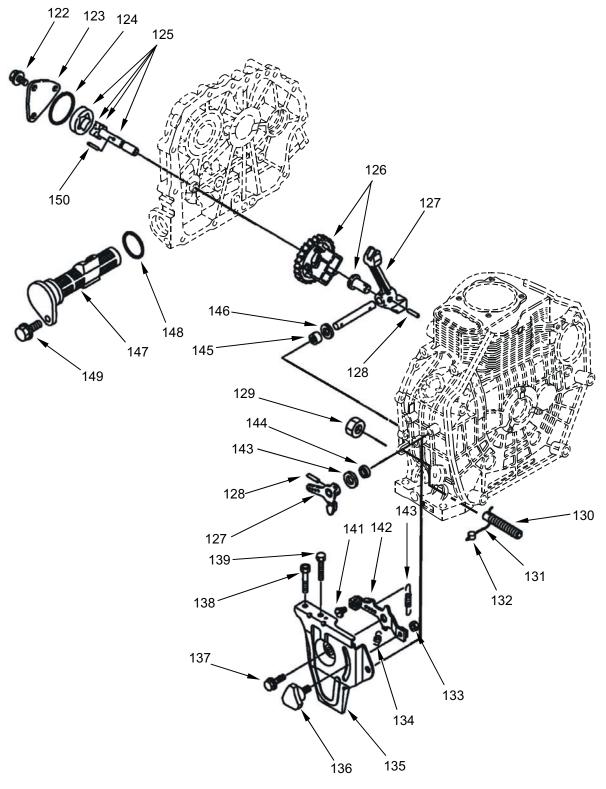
Engine, Diesel (Sheet 7 of 9) (Lubrication Oil Pump Assembly and Governor).
